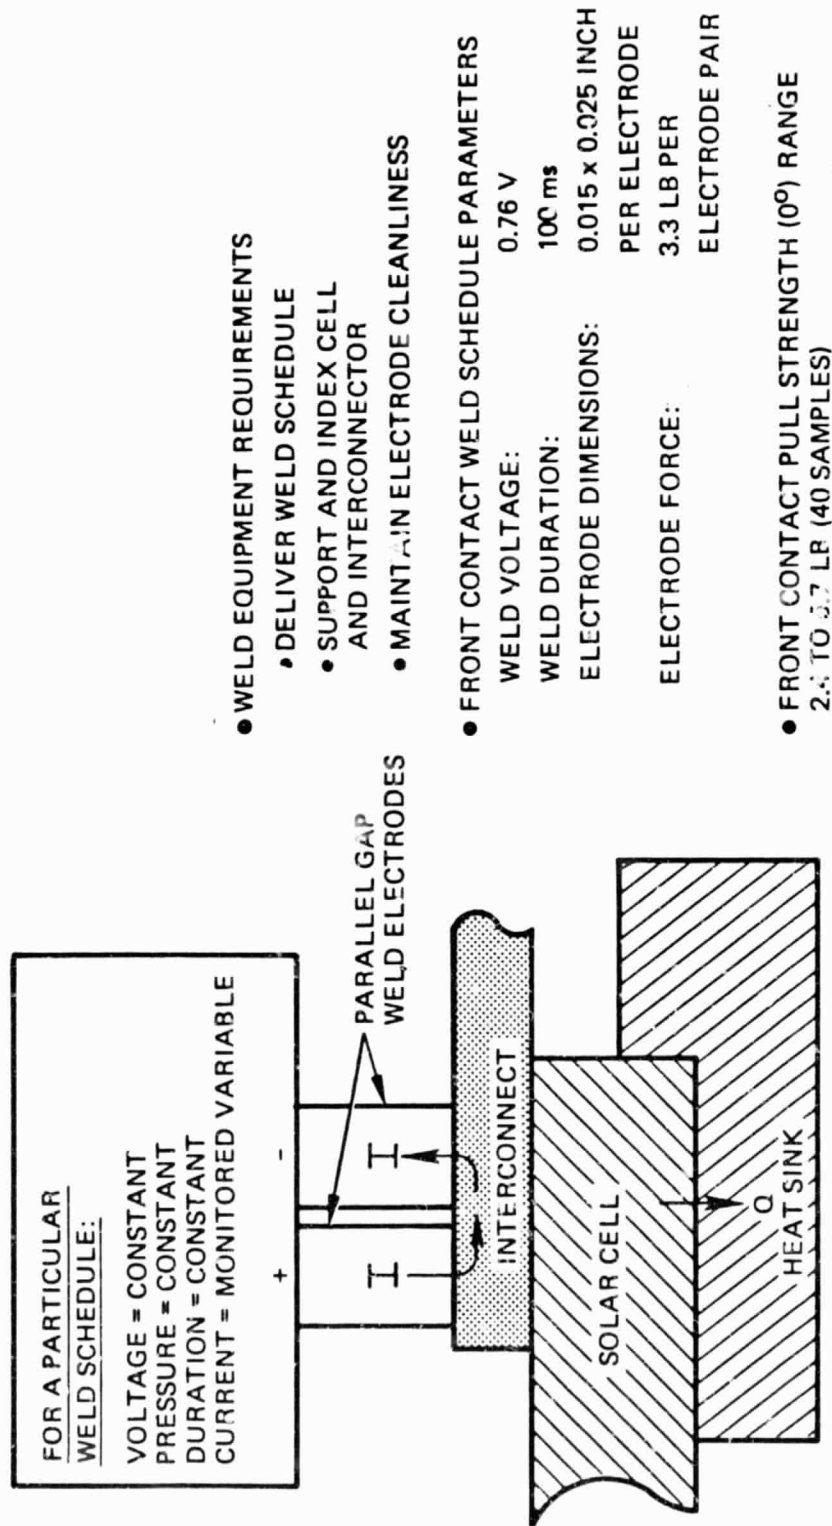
Front Contact Weld Schedule Summary
